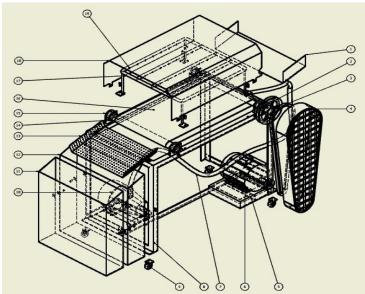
Exploded View of the Fruit Washing Machine: 1-Feeding Tray; 2-Pulley; 3-Belt; 4 Belt Guard; 5-Motor Seat; 6-Electric Motor; 7-Hose; 8-Frame; 9-Roller; 10-Water Pump; 11-Fruit Collector; 12-Water Tank; 13-Drain Net; 14-Shaft; 15-Bearing; 16-Conveyor Belt; 17- Pipes; 18-Washing Chamber; 19-Nozzle or Jet
